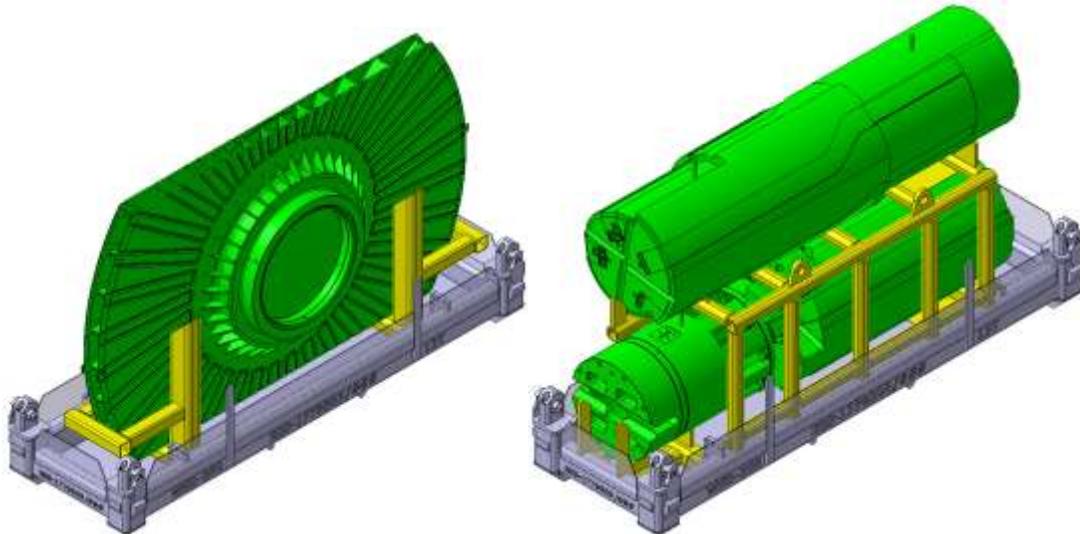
Waste Storage Basket base frame and example component support frames for the parts of the target wheel (left) and moderator reflector plug shaft (right).
